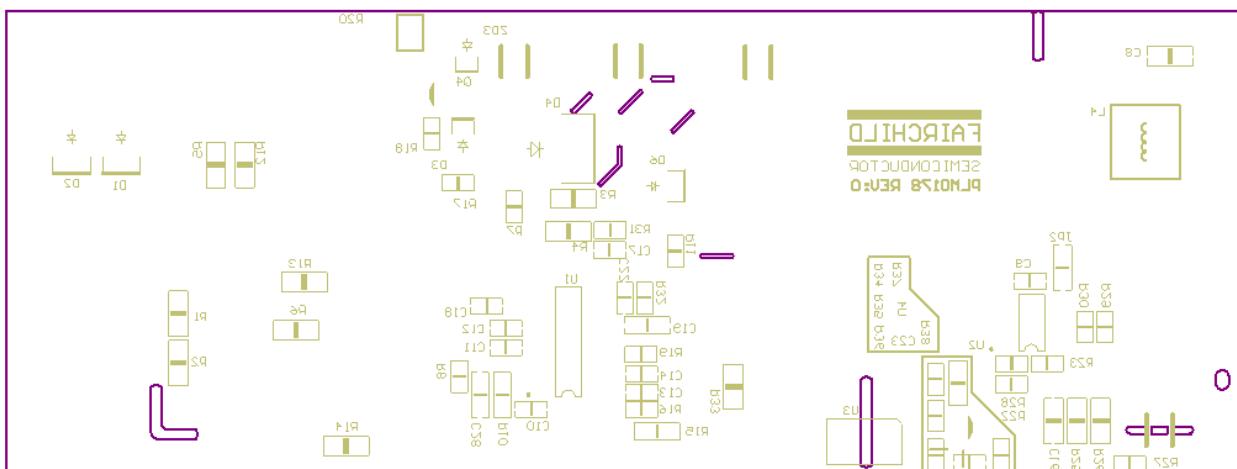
Evaluation Board Layout (Mother Board), Bottom Overlay
